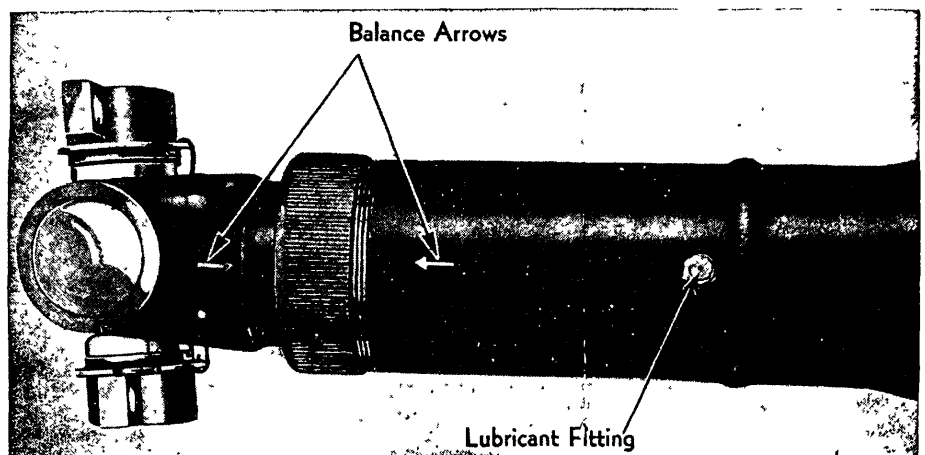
Show arrows lined up to maintain correct balance of propeller shaft and universal
